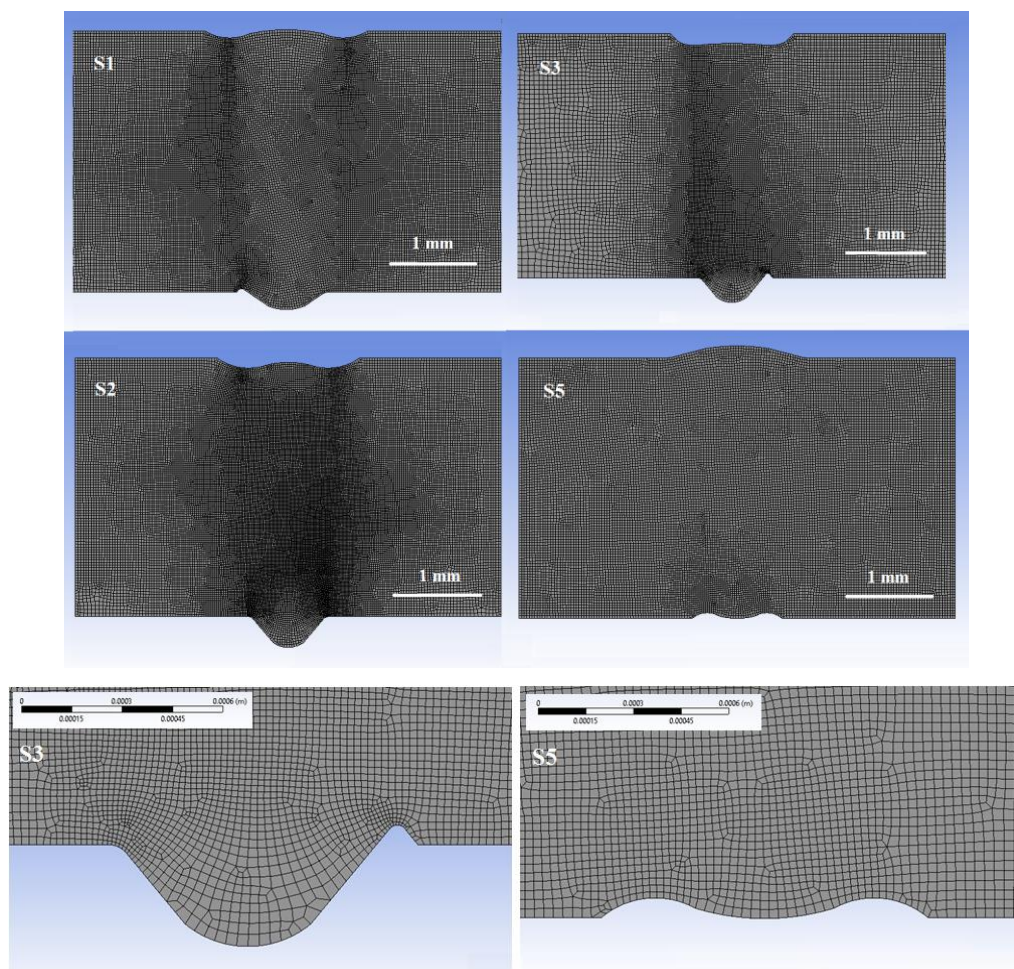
Weld profile models of the welded series and details of meshing used in FEM.
